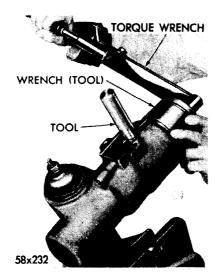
Alignment of Bearing Spacer and Center Bearing Race with Aligning Tool C-3649
